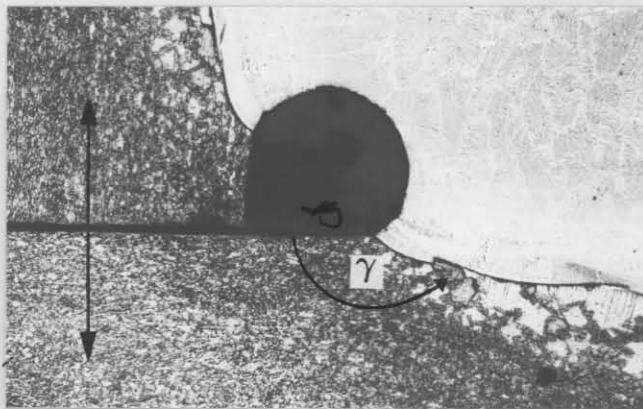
Incomplete joint penetration of a fillet weld in a FLNFT test specimen welded with a 309L filler metal. The direction of the principal stress during tensile loading is indicated (35X).
